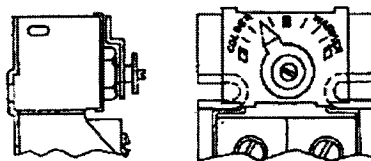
Drawing showing screwdriver slot range adjustment with stops.
